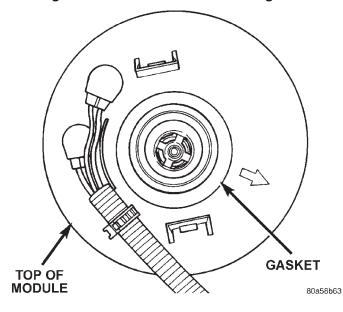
Fuel Filter/Fuel Pressure Regulator Gasket
